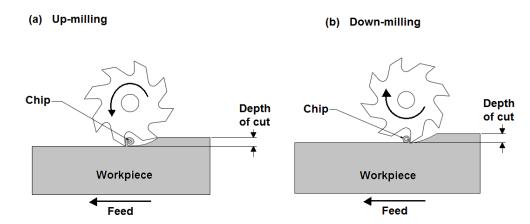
Two modes of peripheral milling are identified as (a) up-milling or conventional milling and (b) down-milling or climb milling
